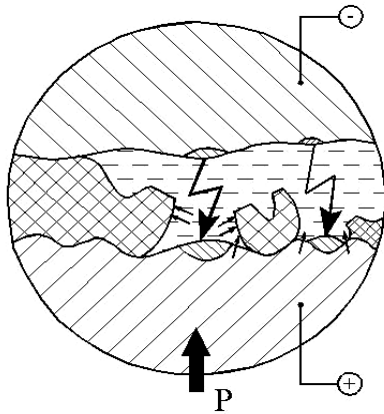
Phenomena occurring within the gap existing between the electrode tool and the workpiece.
